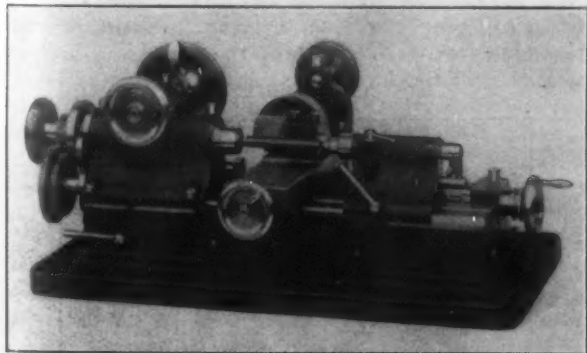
Front View of a Bench Thread Milling Machine Made by the Waltham Machine Works, Waltham, Mass.
